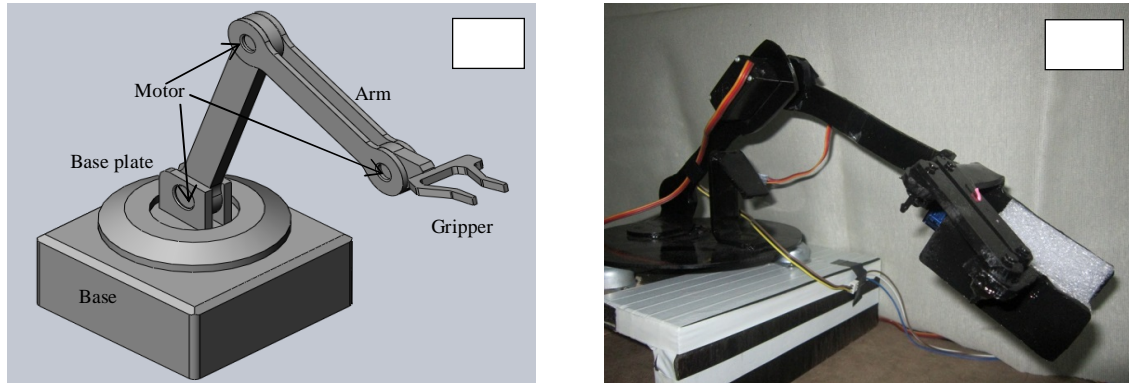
Design of the robotic arm.(a)prototype,(b)CAD design
